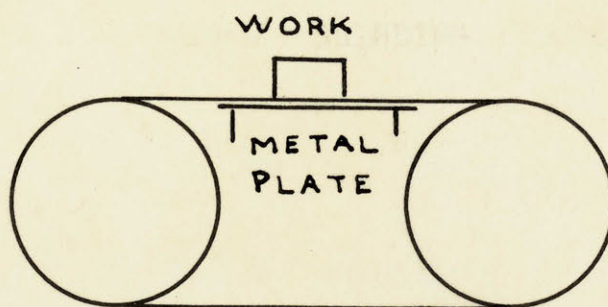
ACTUAL GRINDING DEPTH OF CUT
